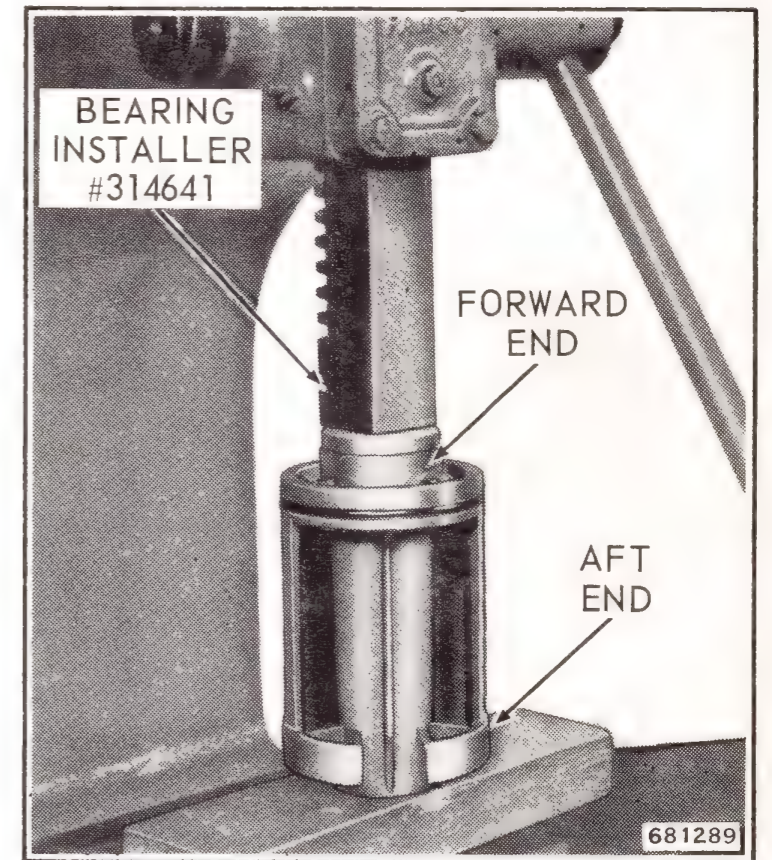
Installing Gearcase Head Forward Bearing Seals
